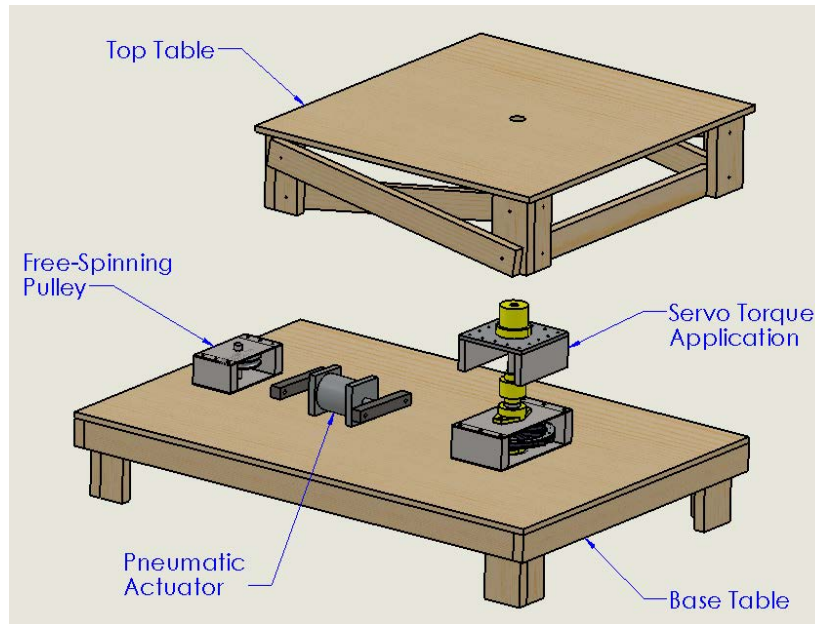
Selected Mounting Design Layout with Loading Plane Closer to Base Table
